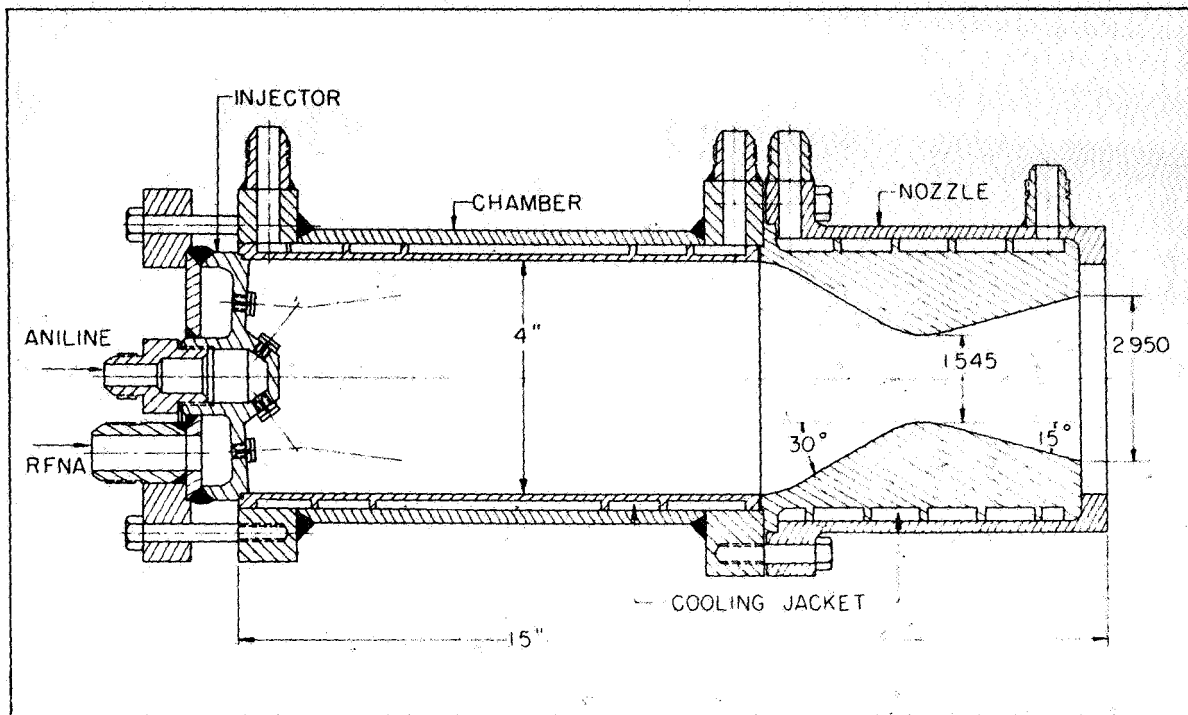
Test Rocket Motor with Optimum Expansion Nozzle
